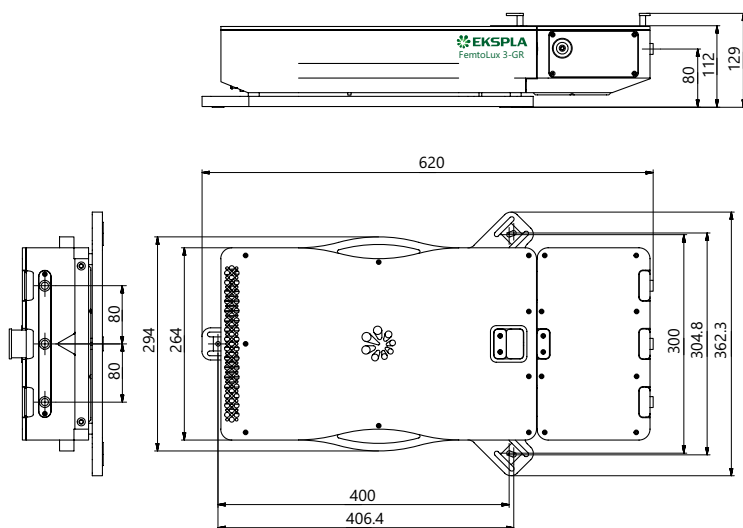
Outline drawings of FemtoLux 3 laser head with second harmonic option
